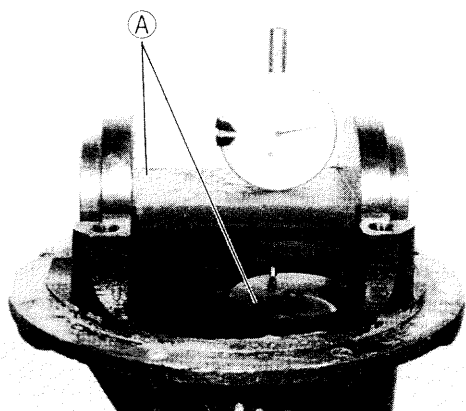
A Special tool (Bevel pinion mounting dummy 09926-78310)
